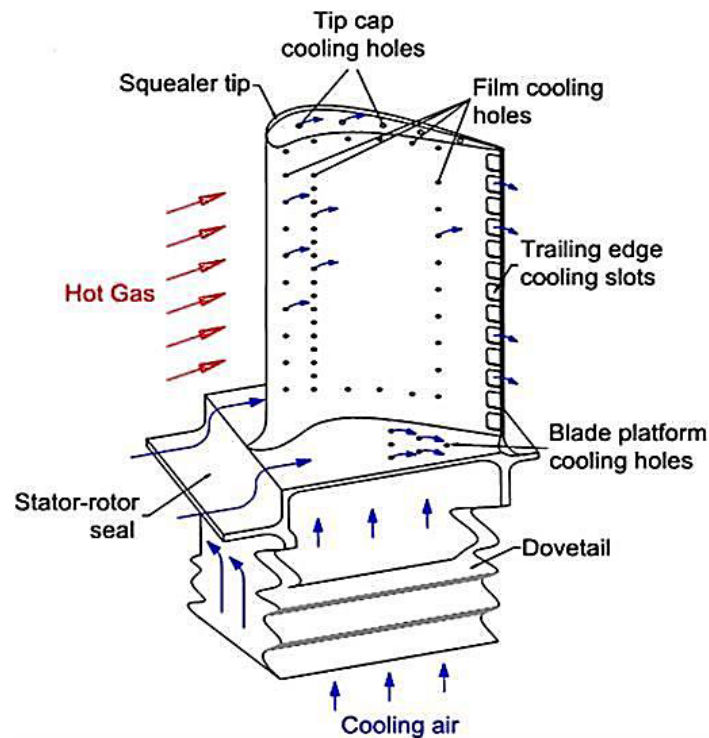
Gas turbine blade with film cooling schematic [9].
